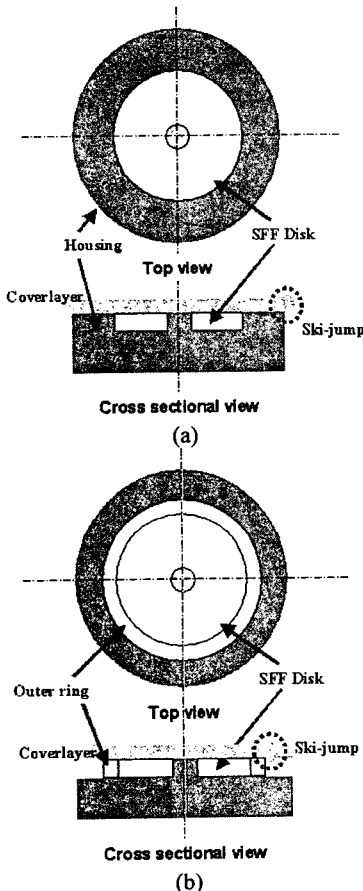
Two designs to reduce ski-jump, (a) is using metal housing, and (b) is using outer ring
